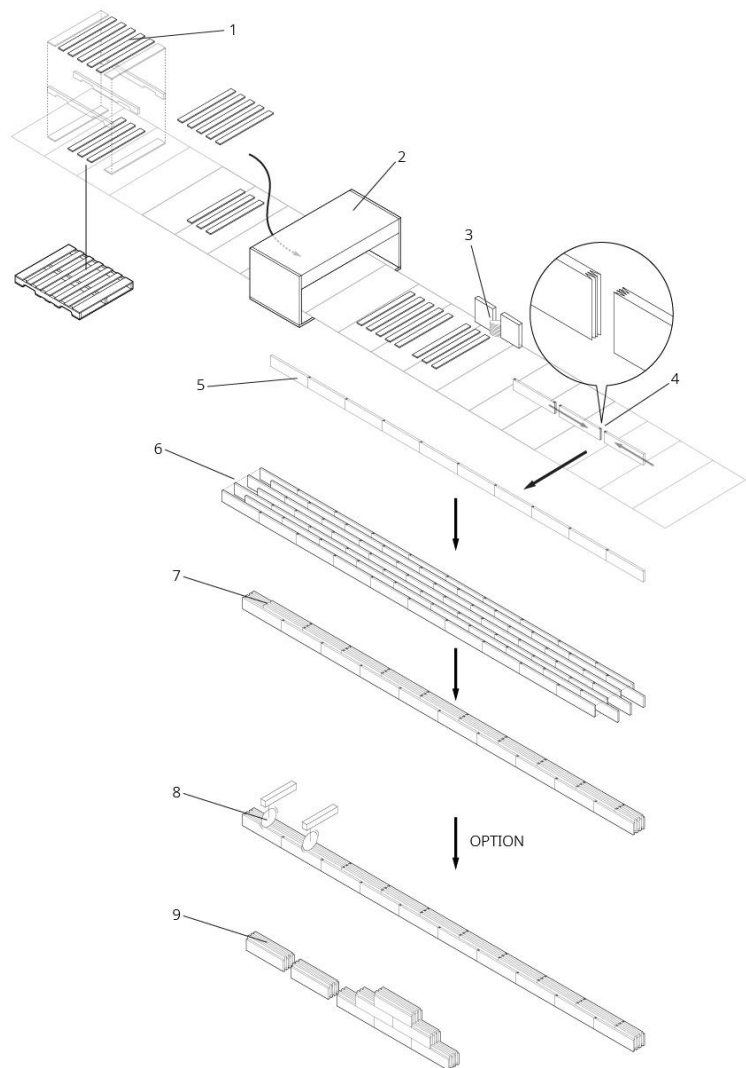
Fabrication process for load-bearing Glulam Wood Block concept
